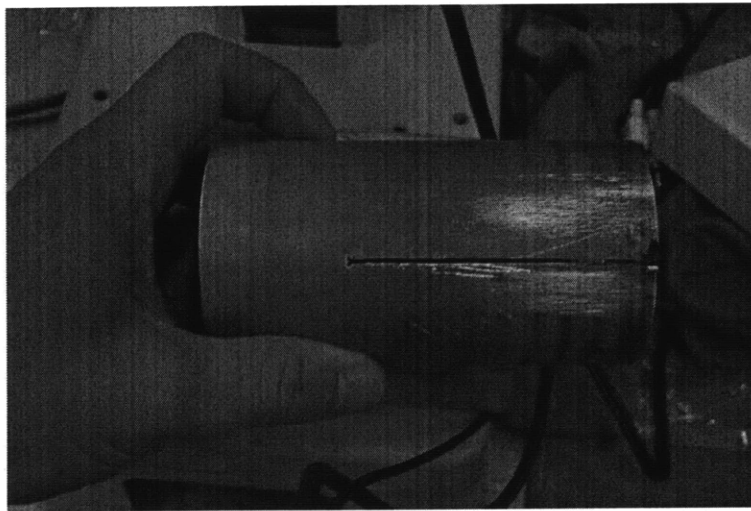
EMFA specimen of Tube 1 (crack length: 3", crack width: 1mm).
